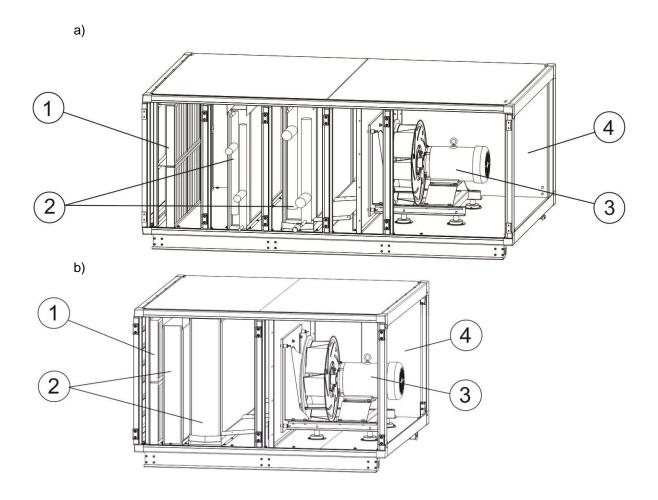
Basic AHU construction, a) standard unit, b) compact unit: 1 - panel filter, 2 - coil, 3 - direct drive plenum fans, 4 - casing
